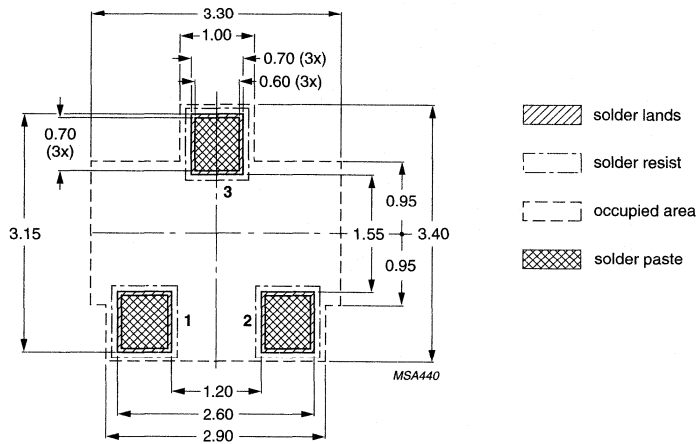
Reflow soldering footprint for SOT346 (SC-59).
